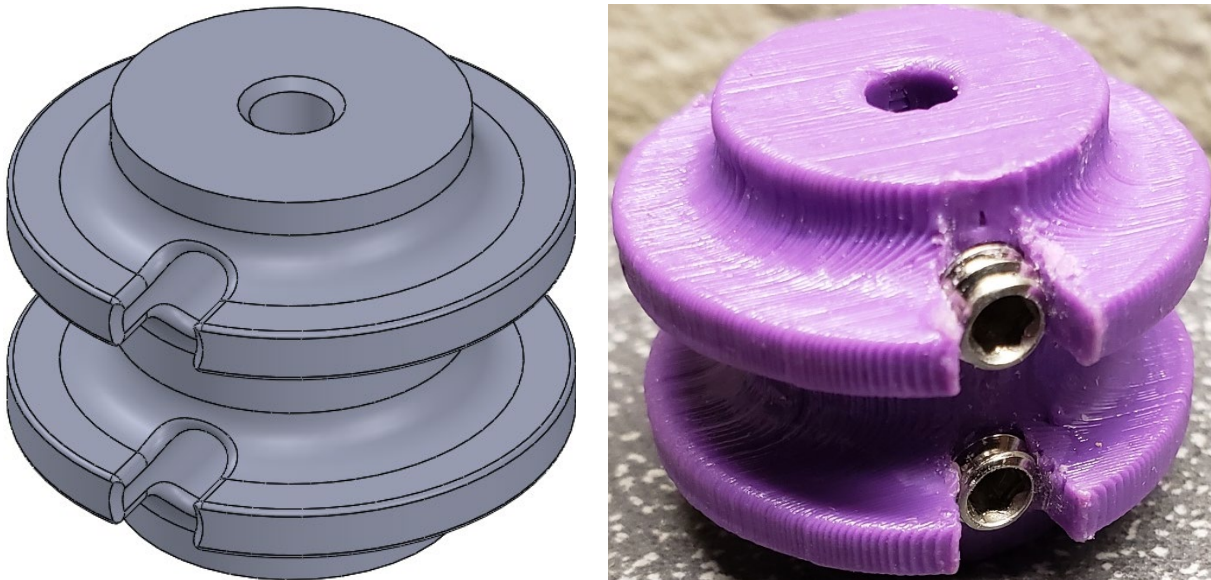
The version 1 reinforced shaft coupler was printed sideways so the layer lines were perpendicular to where cracking was occurring, 2 shells for the threads, and supports for the cylinder. This part is approximately 0.8” tall and 1” in diameter.
